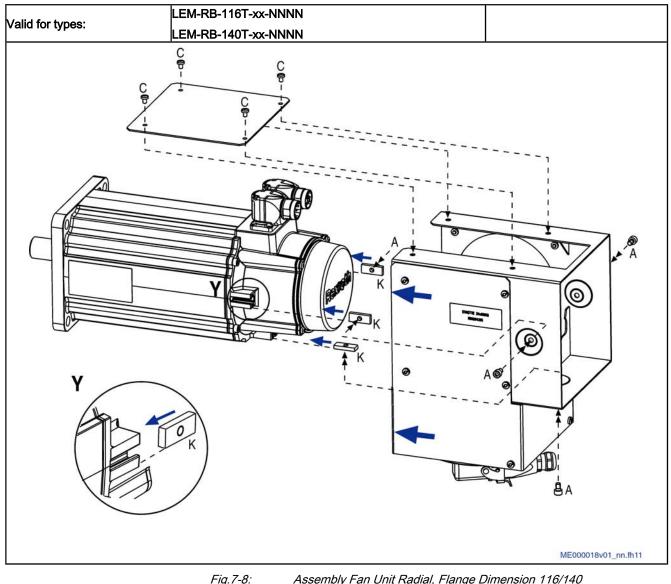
Assembly Fan Unit Radial, Flange Dimension 116/1	140
